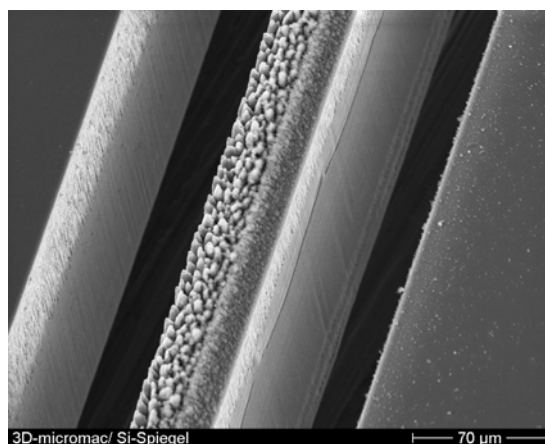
Femtosecond-laser machined spring bar of a MMD (enlarged section of Fig. 4).
